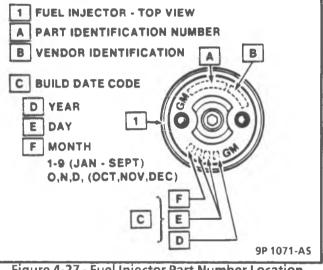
Fuel Injector Part Number Location TBI 220
